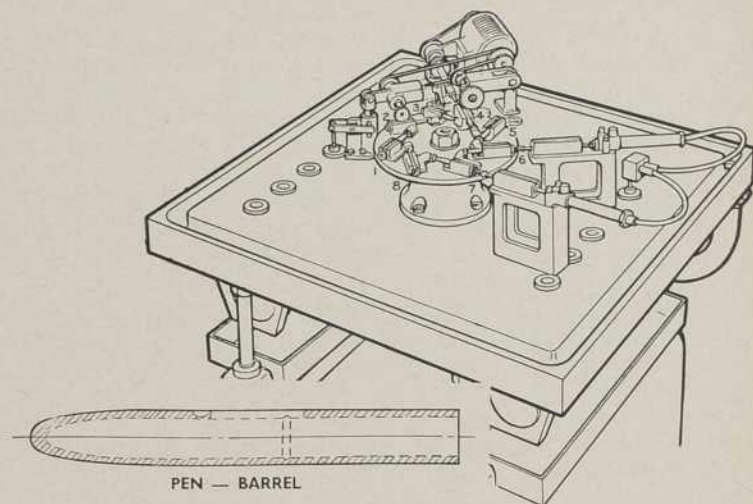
A—AUTOMATIC BALL-PEN MANUFACTURE USES COMPASS BASE FOR PEN BARREL MACHINE. TOTAL TIME OF MACHINING CYCLE IS 4 SECONDS.
